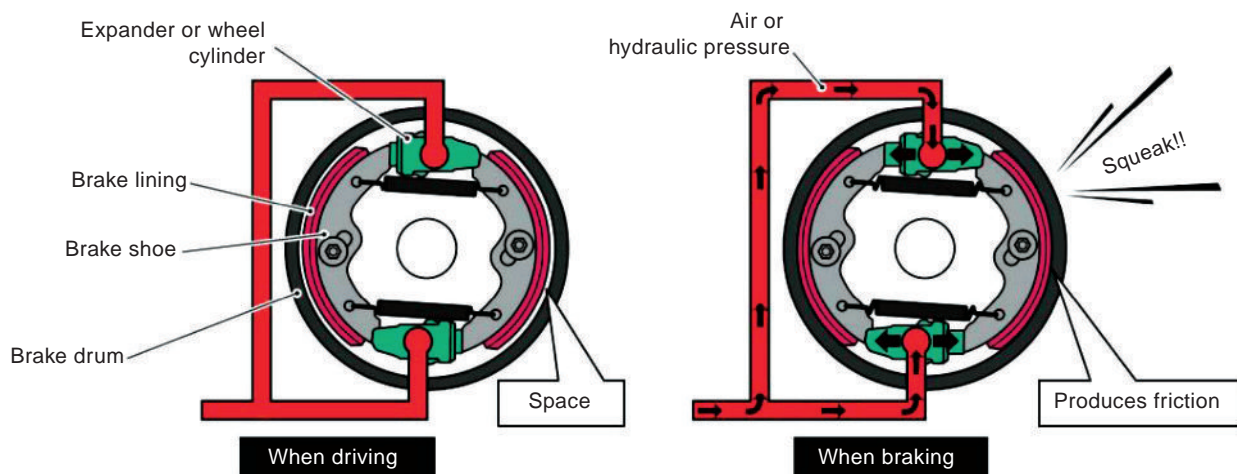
(b) Arrangement of the wheel cylinder
